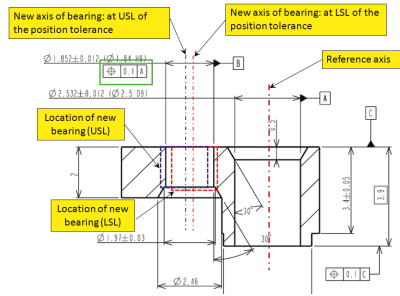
Modeling of the position geometrical tolerances in SICONOS.
